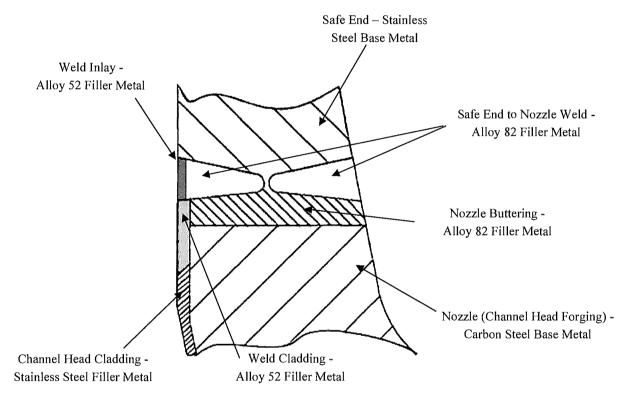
Point Beach Unit 2 Steam Generator Dissimilar Metal Weld Configuration
